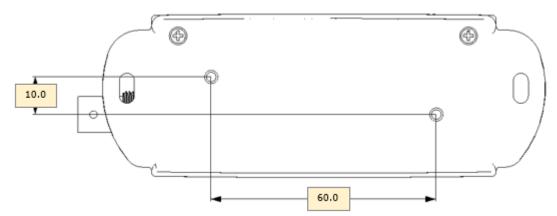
LDSBus Dissolved Oxygen Sensor Adapter Dimension - Bottom View
